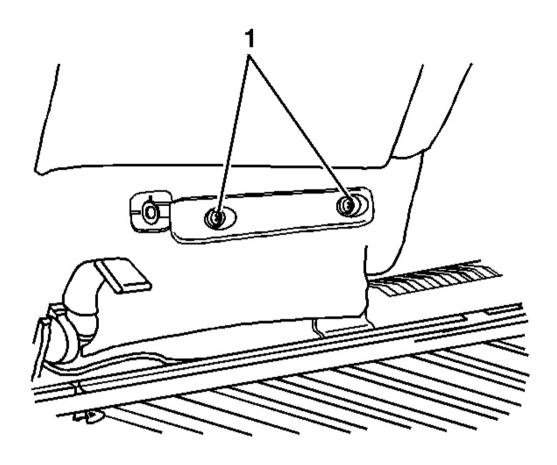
Handle Mounting Screws Courtesy of GENERAL MOTORS CORP.
